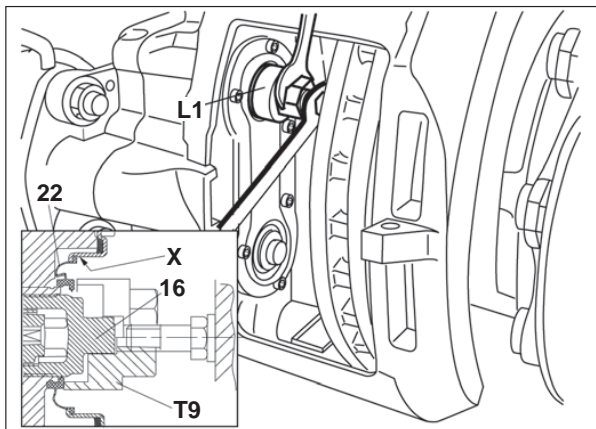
ON-VEHICLE INNER SEAL INSTALLATION
